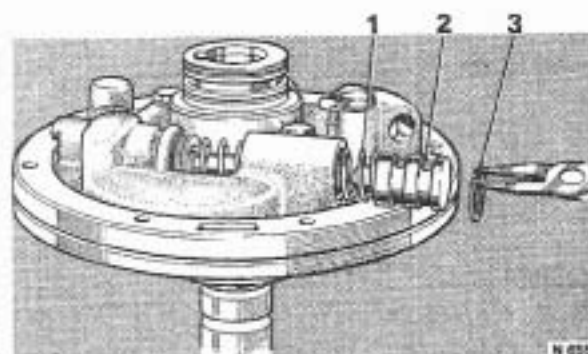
REMOVING THE REGULATOR VALVE RETAINING CIRCLIP
